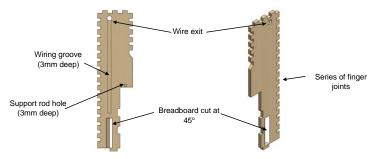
FRONT AND ISOMETRIC VIEW OF THE RIGHT PIECE. THE PART INCLUDES THE LOCATIONS OF THE GROOVE AND HOLES FOR FEEDER WIRING AND THE BREADBOARD.
